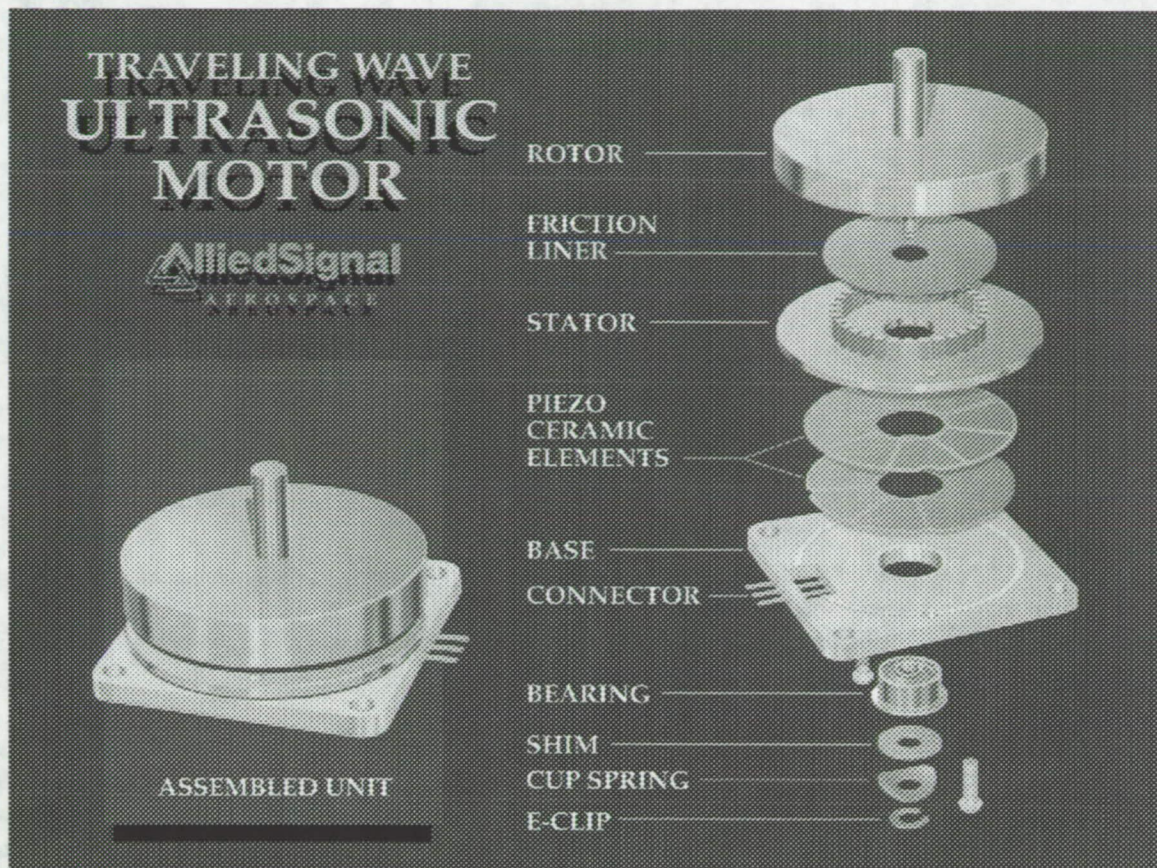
Assembled and exploded view of a traveling wave ultrasonic motor
